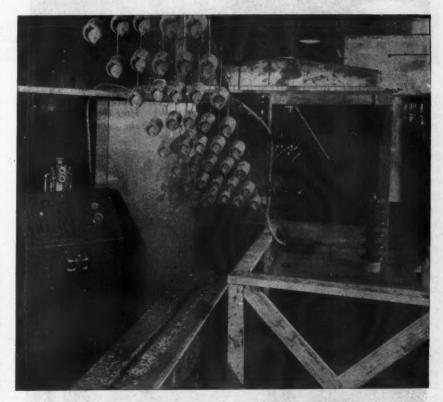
WARPLANT APPLICATION of the "detearing" process. After being dipped, these fragmentation bomb parts on conveyor rack are passed over a high-voltage grid which removes excess paint. Control panel is at left; voltage pack at right.
